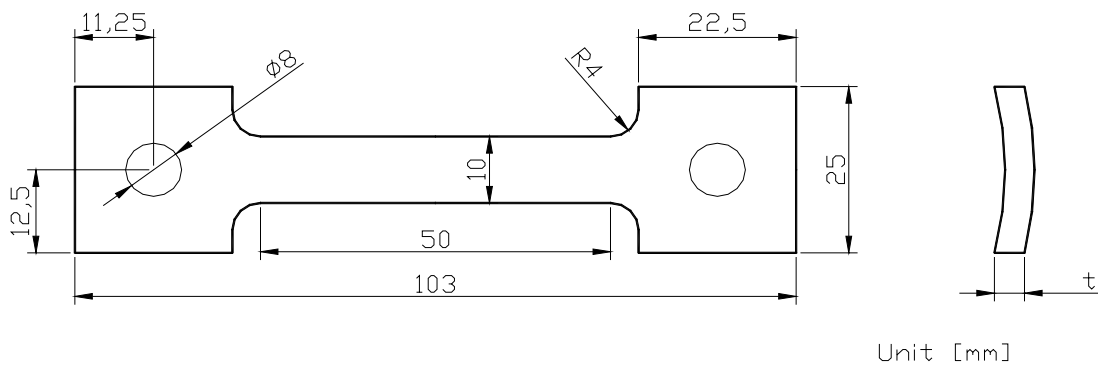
Dimensions and shape of axial-direction creep test specimen.
